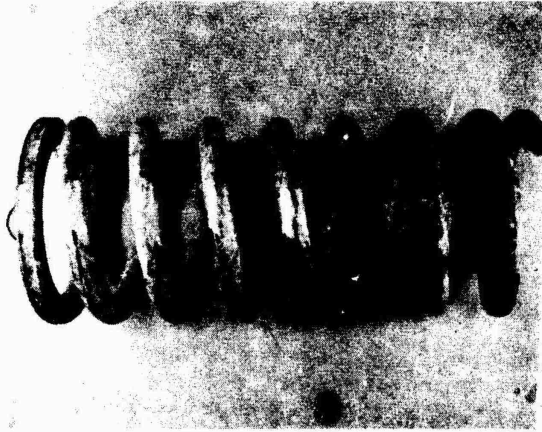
Broken Right Front Spring Three Coils from Bottom On M151A1C after 2459 Test Miles.
